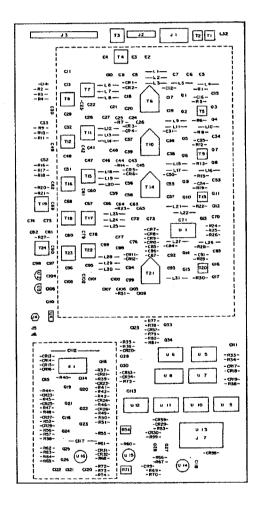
AB Floating Power Supply/Bias Supply Board Assembly Component Locations.
